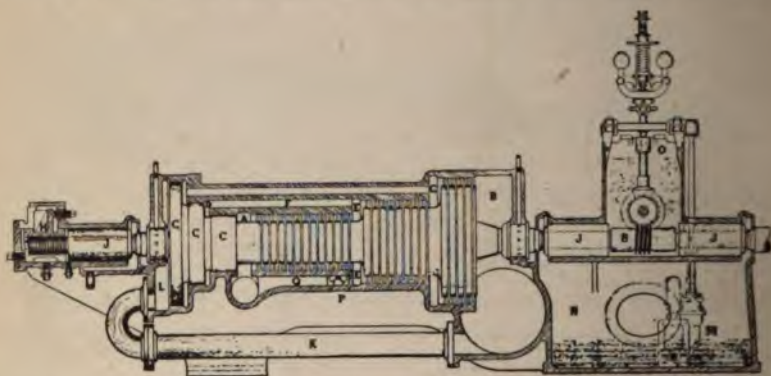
Section of Parsons Turbine, with Bearings, Lubricating Arrangement, and Governor.
